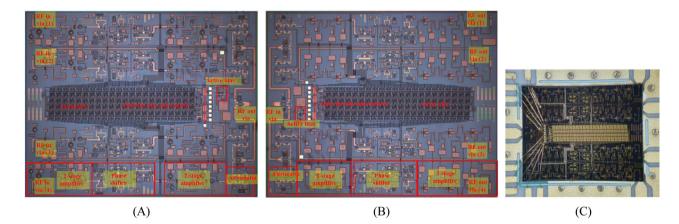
Photomicrographs of the fabricated multifunction chips (MFCs) with an area of $5.2 \times 4.2 \text{ mm}^2$ and a photograph of the MFC assembled on a printed circuit board (PCB). (A) Receiver MFC. (B) Transmitter MFC. (C) MFC assembled on a PCB.
